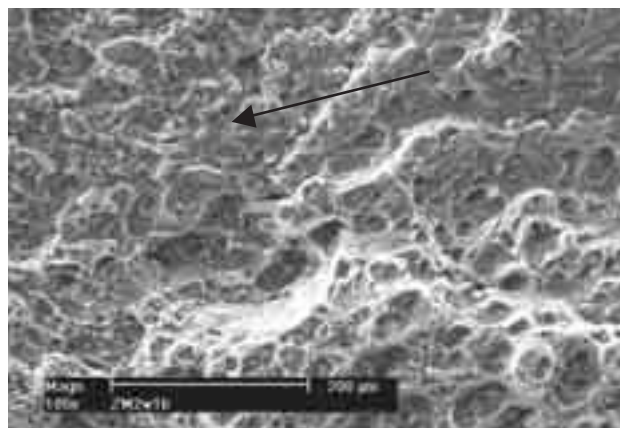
Fragment of passage from the fatigue fracture (marked with an arrow) into a plastic fracture
